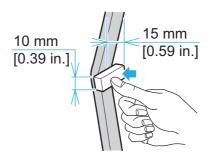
Belt Tension - Adjust (Ribbed Belt)
